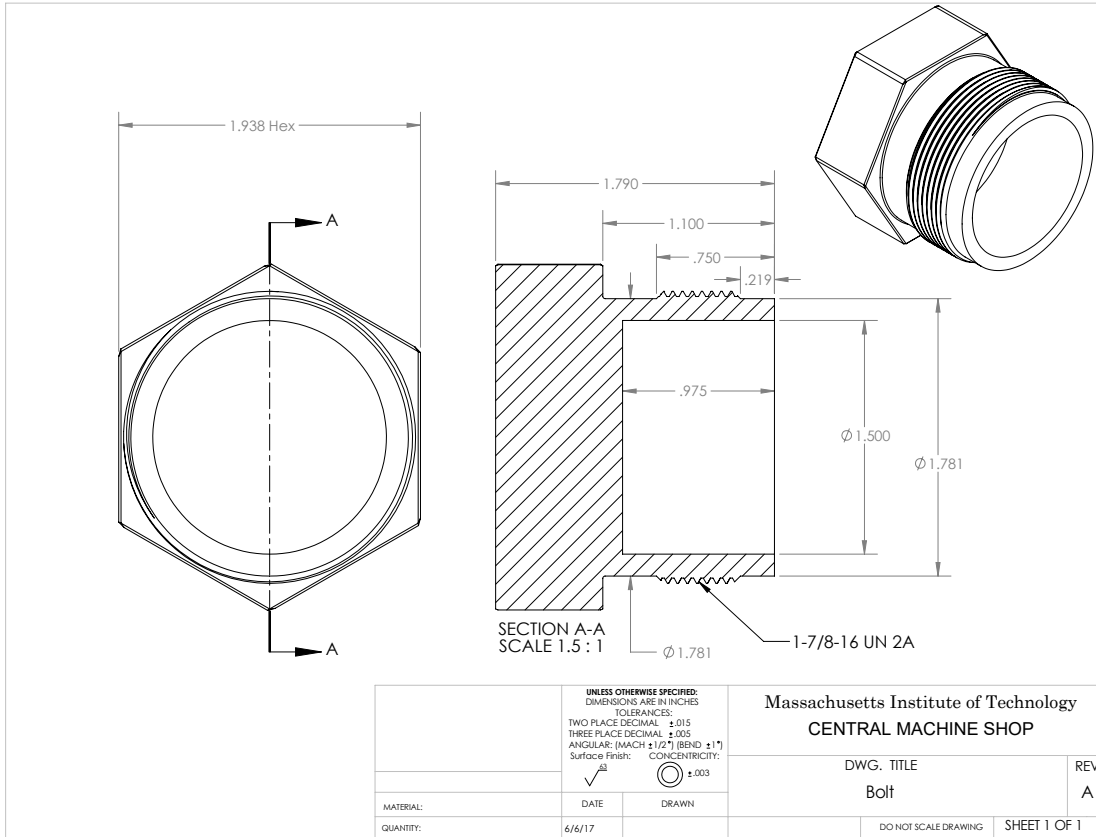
Schematic drawing of the bolt part of the steel pressure reactor.
